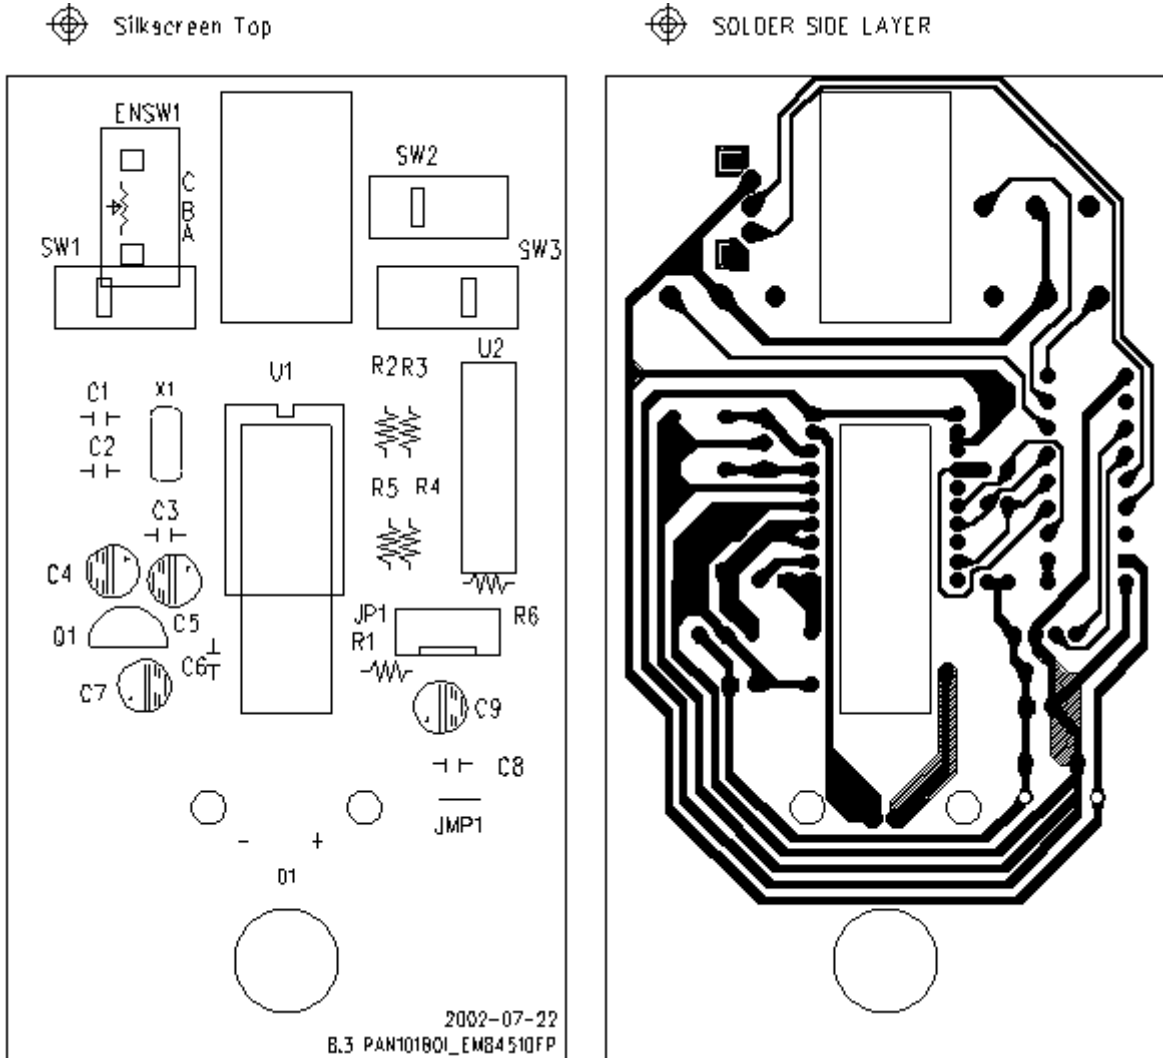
Example printed circuit board layout. (PAN101BOI V.S EM84510FP)
